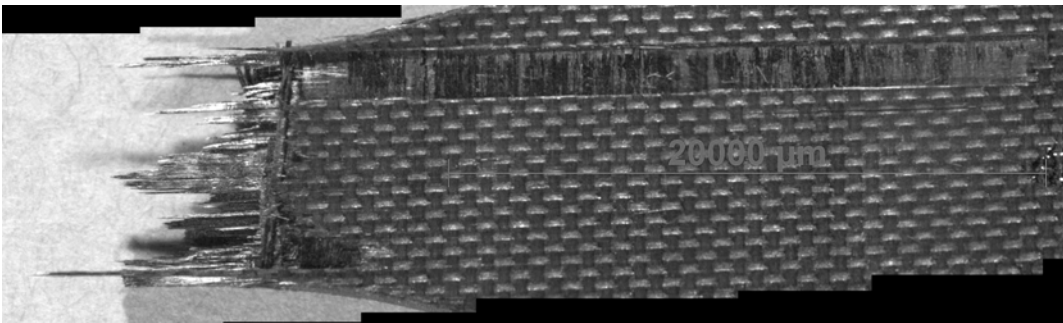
Expanded view of damage zone for [0/90] IM7/BMI 5250-4 subjected to tensile loading demonstrating fiber fracture and fiber pull out along entire length of the specimen
